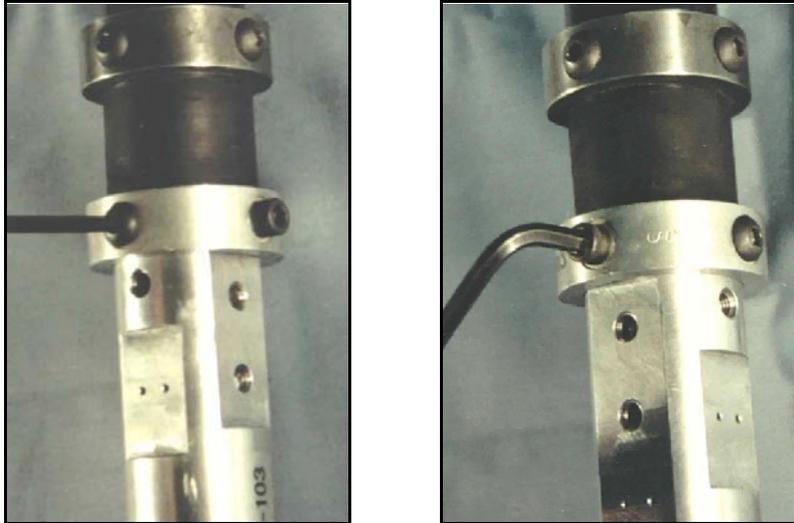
Upper Tibia Tube attached to Compliant Bushing
